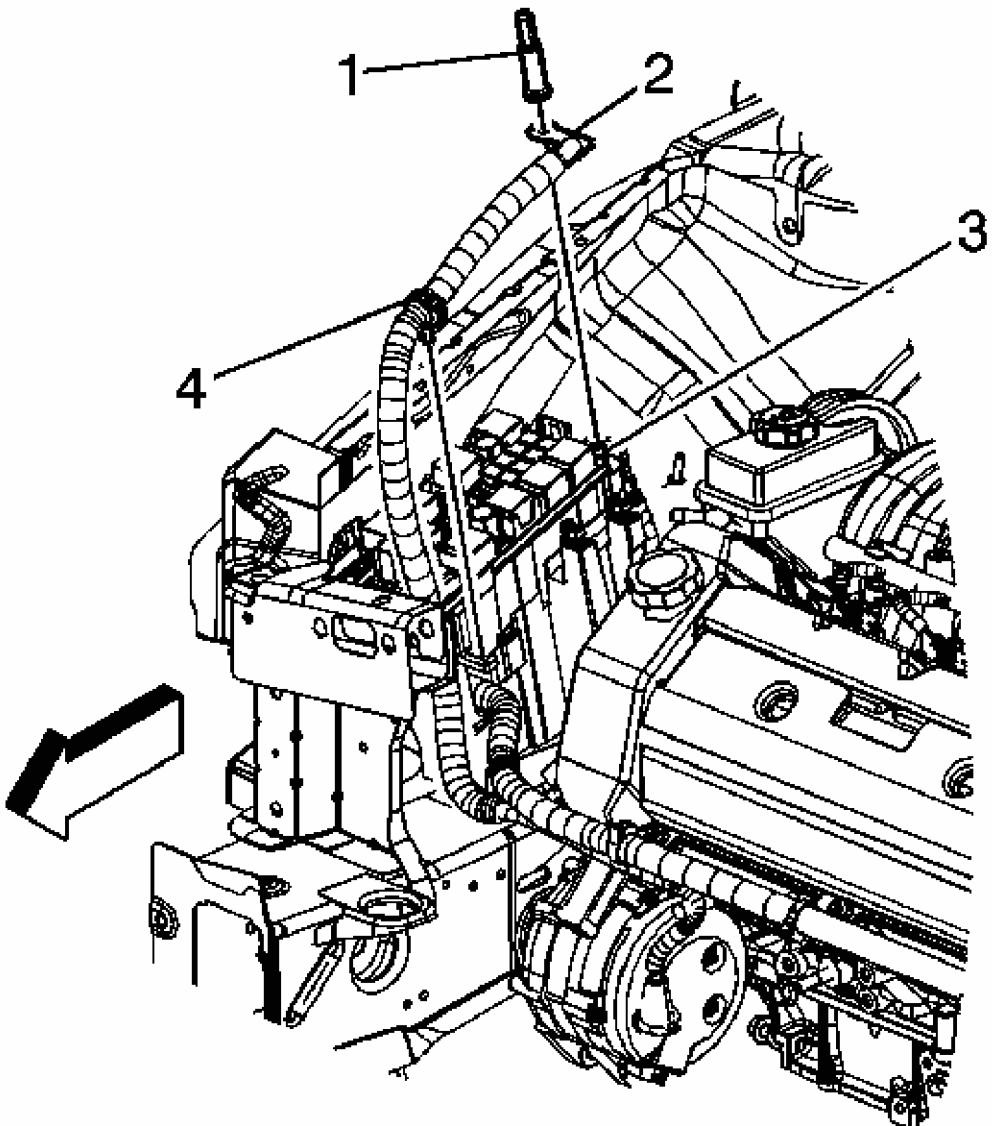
Identifying Starter Solenoid Cable To Bussed Electrical Center
